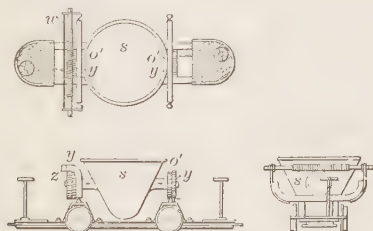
THE NESMITH SINGLE-BOWL DUMPING CAR.
